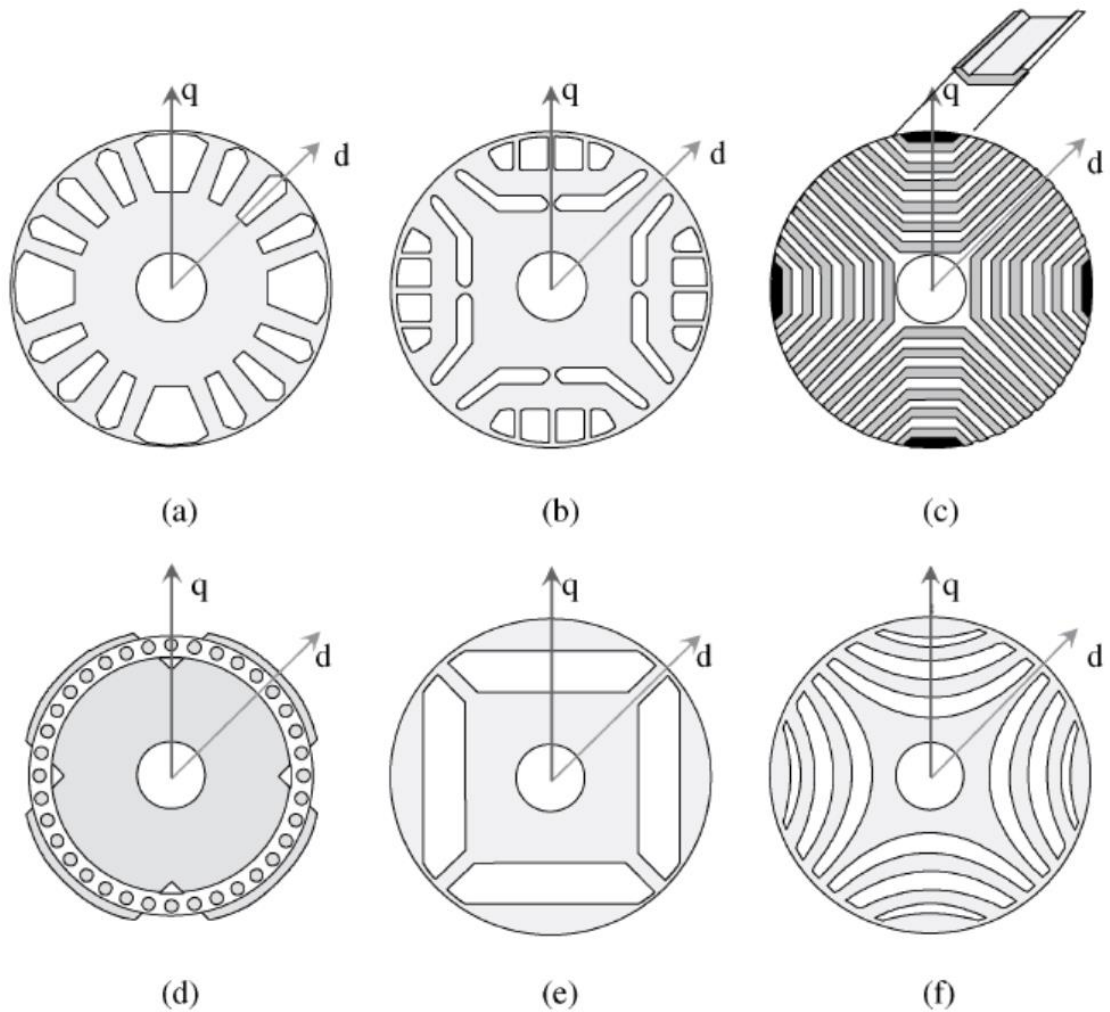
Possible rotor constructs for synchronous reluctance machine. (a) induction machine rotor with some teeth removed, (b) flux barrier rotor with cage, (c) axially laminated rotor, (d) salient-pole synchronous machine rotor without excitation windings (e) flux barrier rotor without cage and (f) multilayer flux-barrier rotor.[1]
